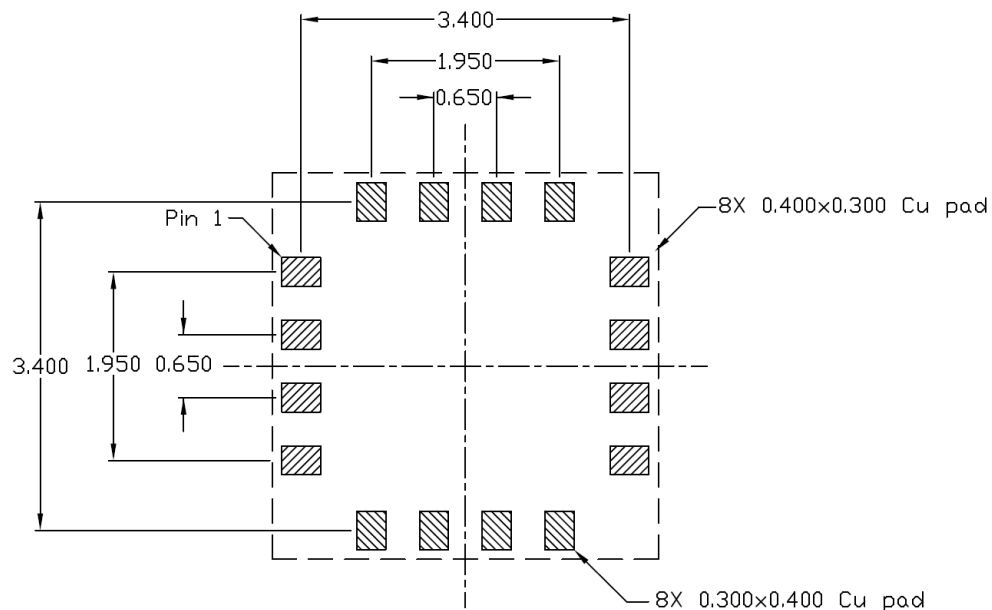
Example of a PCB land pattern for the 4 x 4 mm LGA package (Top view)
